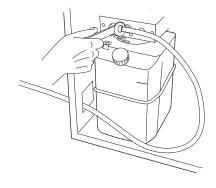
Connecting the hydraulic hose to the L-coupling
